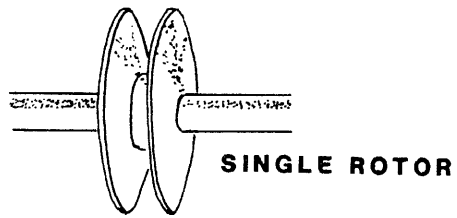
Co-rotating disc extruder. (Courtesy of Farrel Corporation.)
